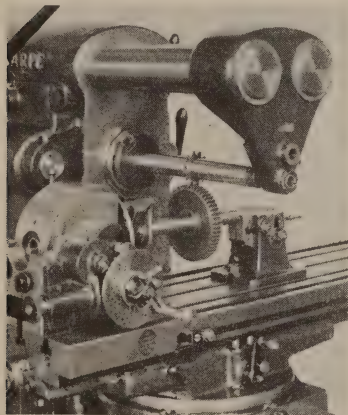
Cutting a spur gear. The gear is held on a mandrel between the index centers.
